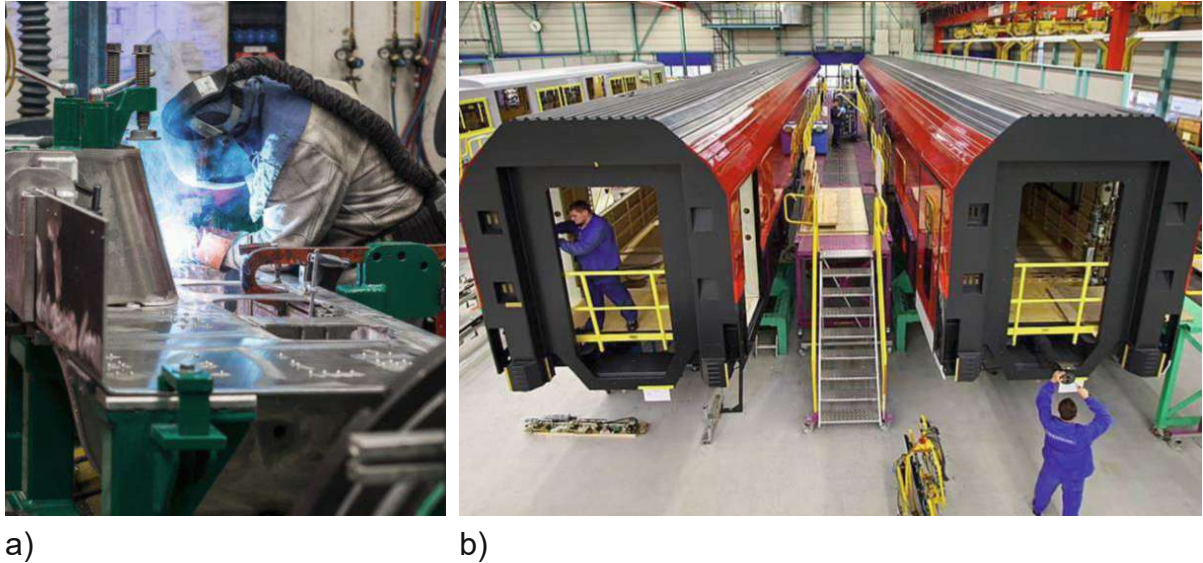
a) GMAW of a rail vehicle component mounted in a jig. b) Assembly of rail vehicle [13].
